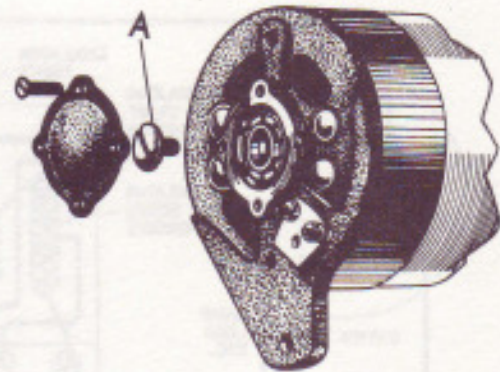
COMMUTATOR END BRACKET SHOWING COVER AND THRUST SCREW "A" REMOVED.
